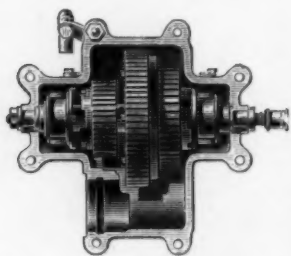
Lower case, containing the speed-changing gearing, the clutch and the wheel that controls the motive pinion.
